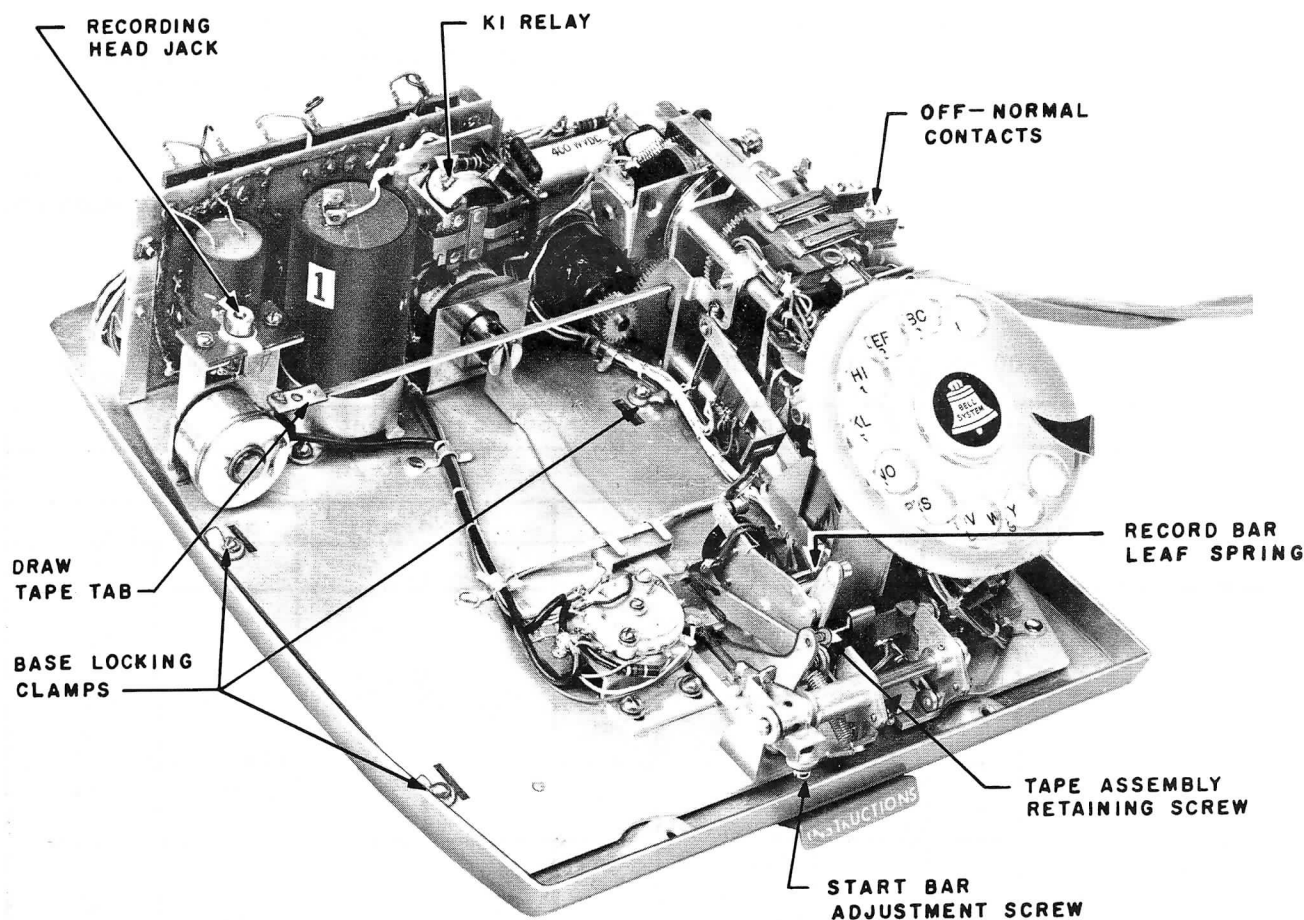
KS-16844 Rapidial, List 6 Tape Assembly Removed (Front View)
